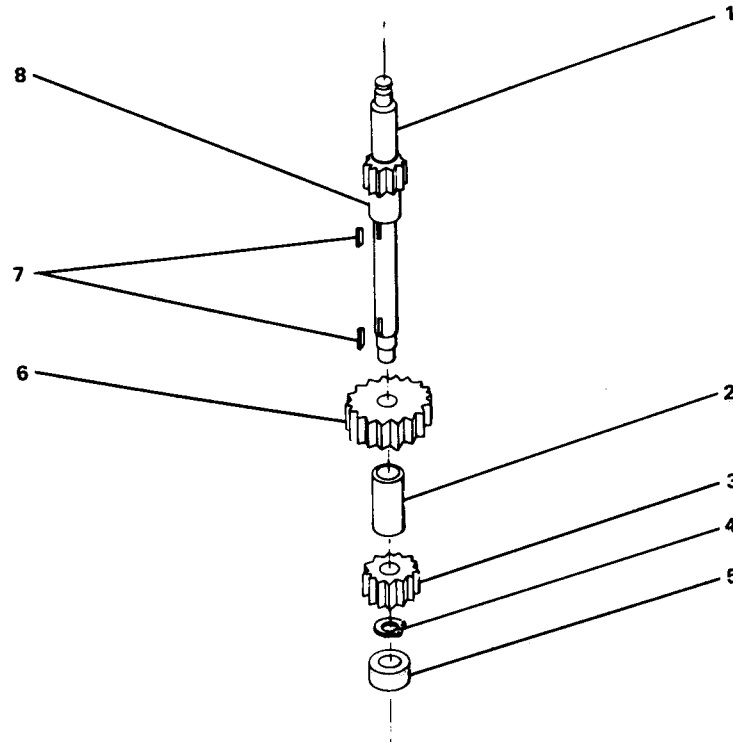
Repair Intermediate Shaft Assembly.
